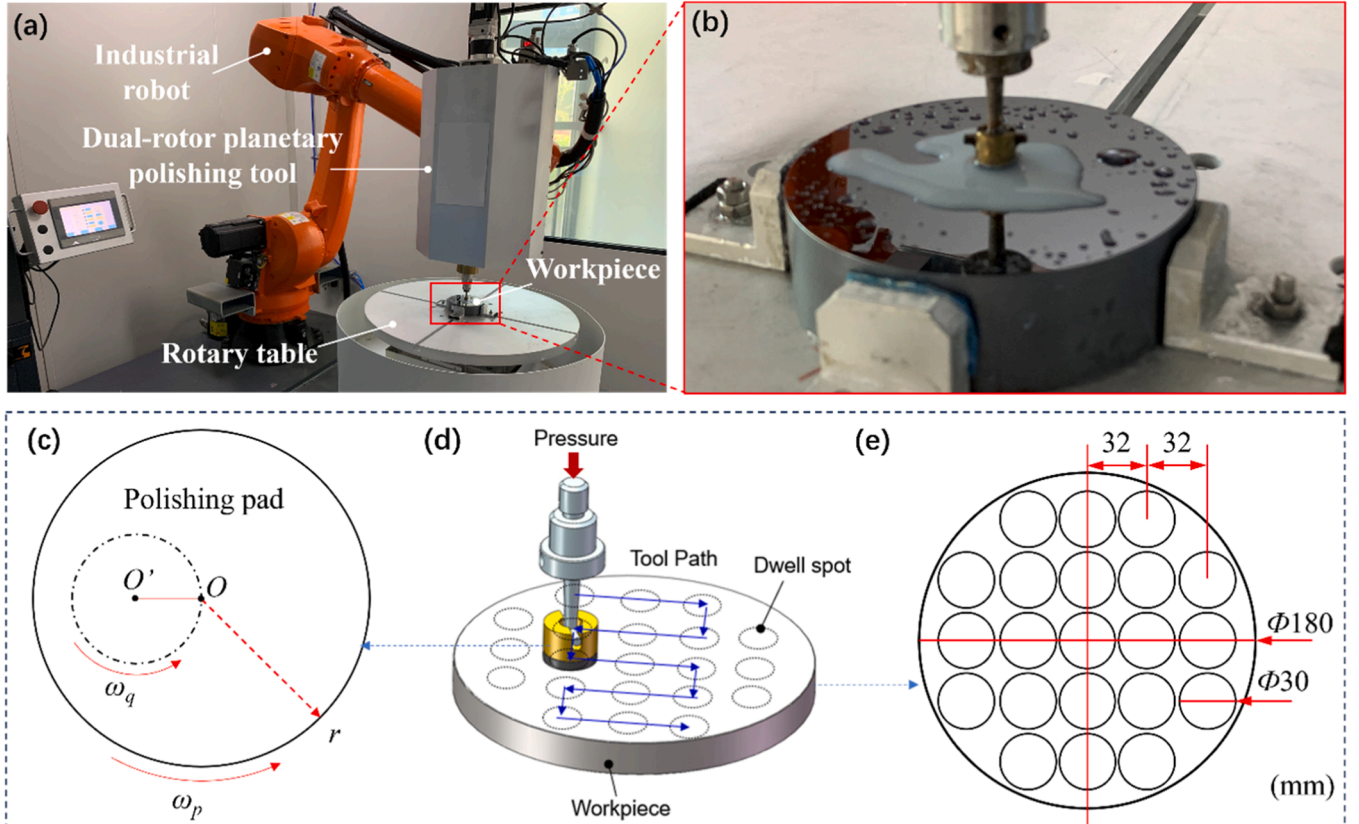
The robotic polishing experimental settings. (a) RP equipment; (b) Workpiece with a diameter of 180 mm; (c) Mechanism of polishing pad rotation. (d) Polishing pad tool path during RP process; (e) Dwell spot setting.
